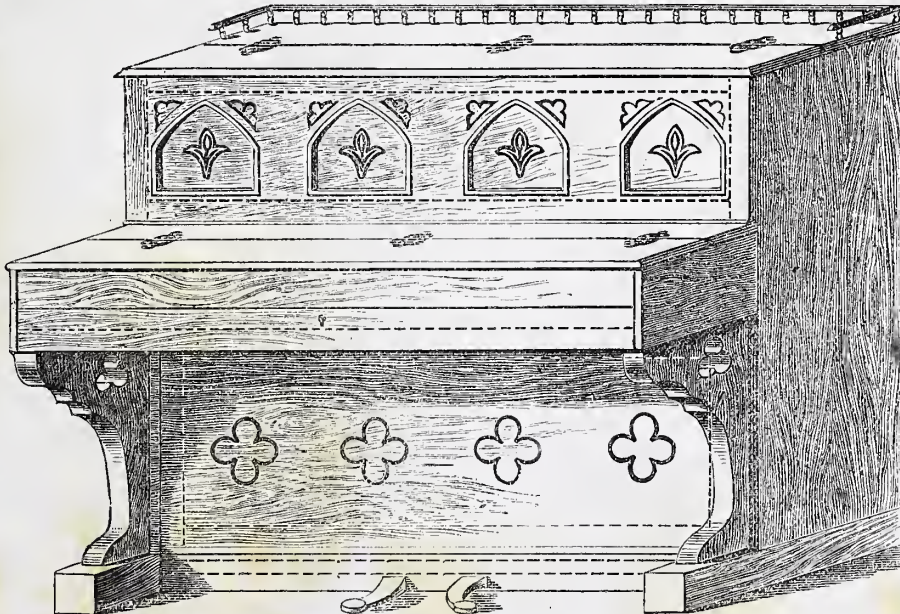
Case in Isometrical Perspective, Dotted Lines showing Top and Bottom Doors, Front of Key Bottom, and Bottom Board.
